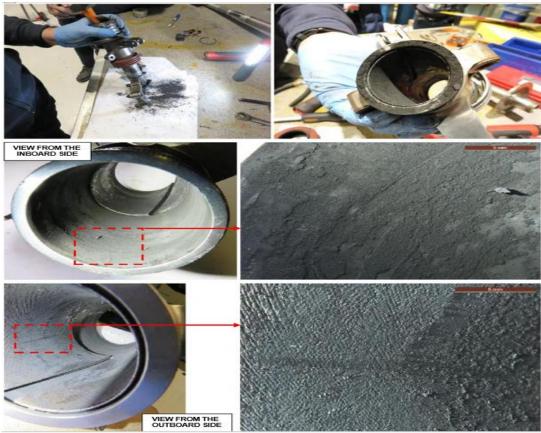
Details of the slider assembly during the disassembly from the tail rotor and before the cleaning. The inner surface is covered by dark powder from the heavily worn lining of the inner bushing.
